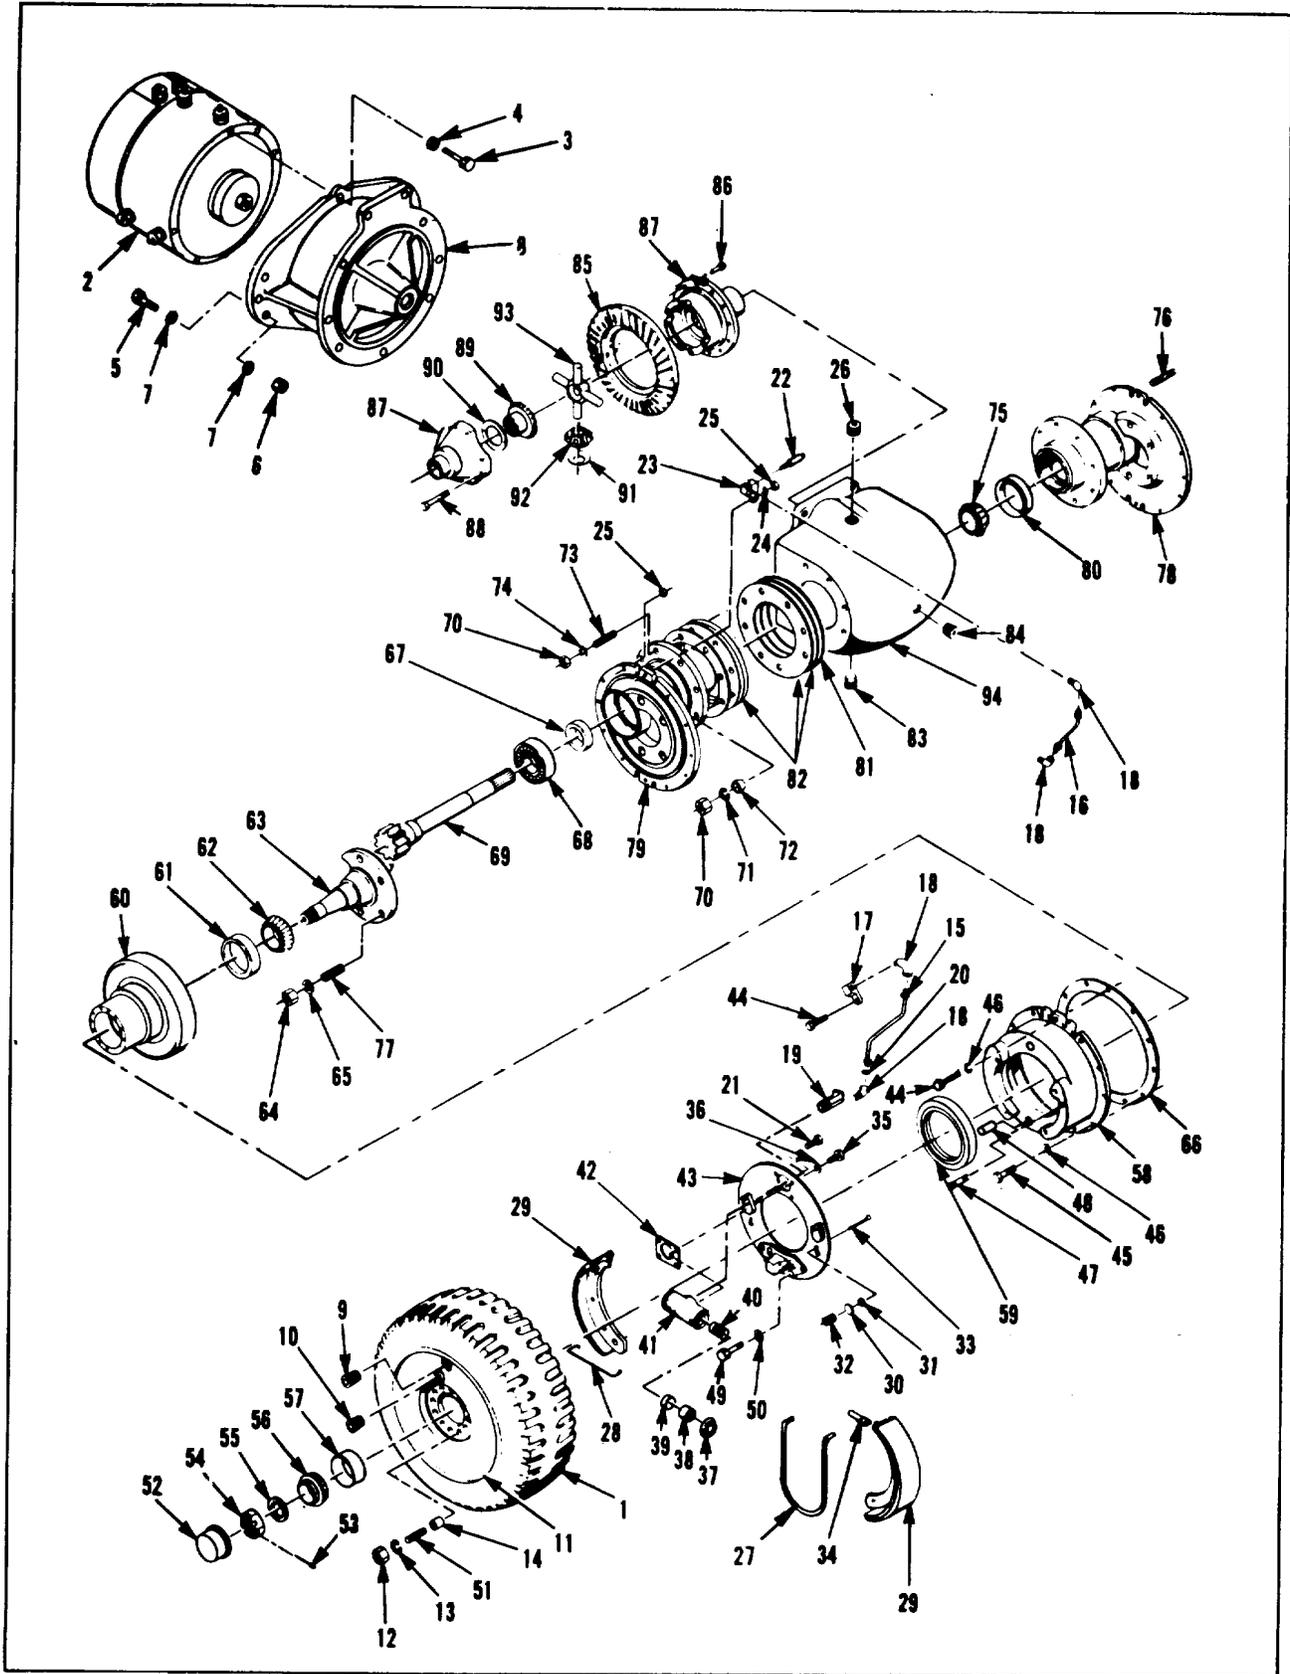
Drive Axle, Adapter, Drive Motor and Tire
